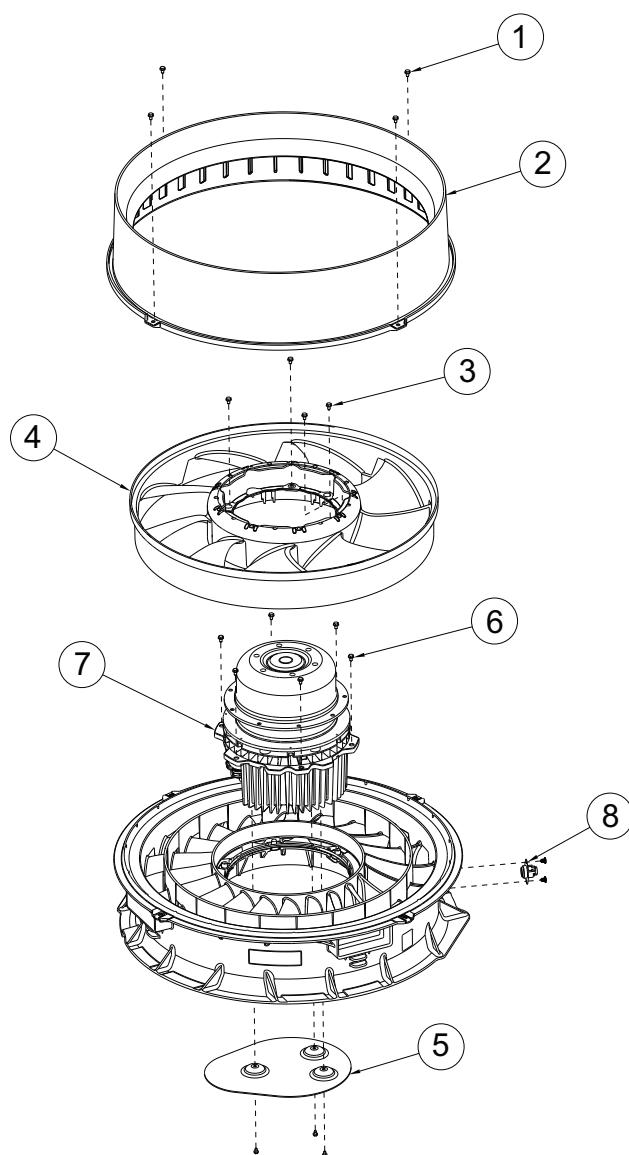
Disassembling High Static Motor and Fan Assembly
